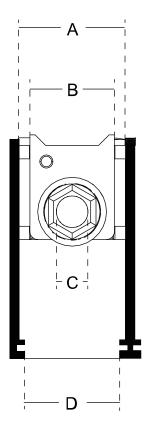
Frames 9, 10 and 11 Terminal Block Dimensions
